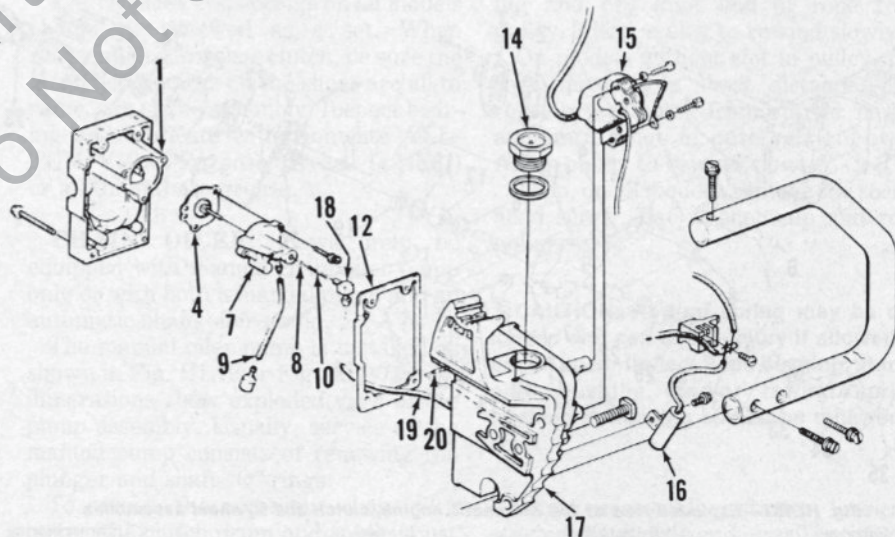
Exploded view of oil tank and related assemblies. On models equipped with solid-state ignition, condenser (16) is not used and ignition module is located in place of ignition coil (15).
